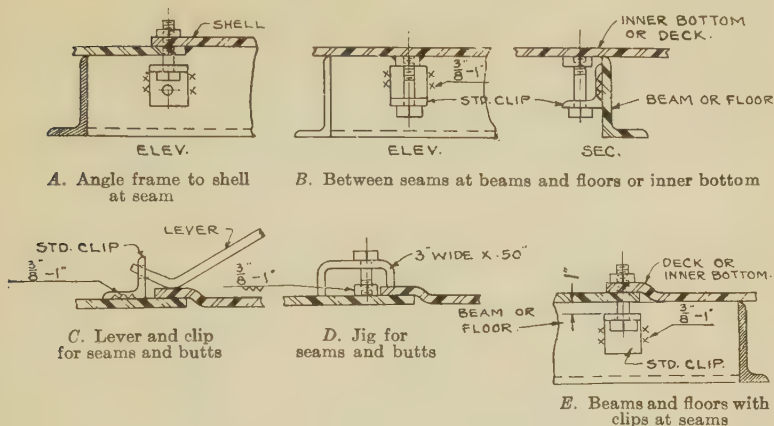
Assembly devices for welded ships and other structures.
